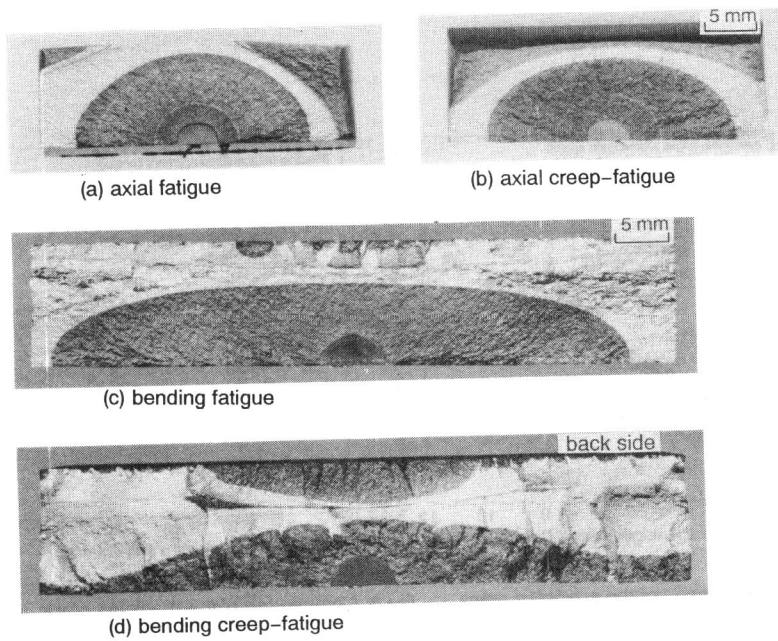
Fracture surface of the specimen showing the beach mark.
